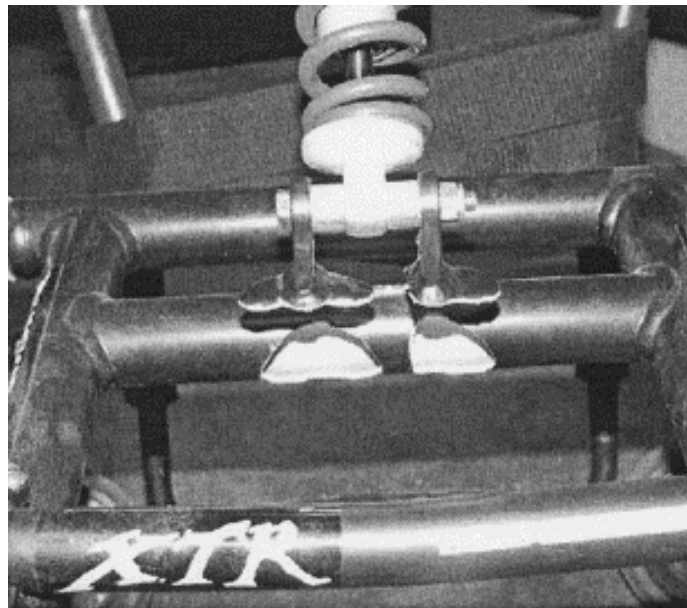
Failure of Quickie XTR™ Chair 1, Where the Mount is Welded to the Frame
